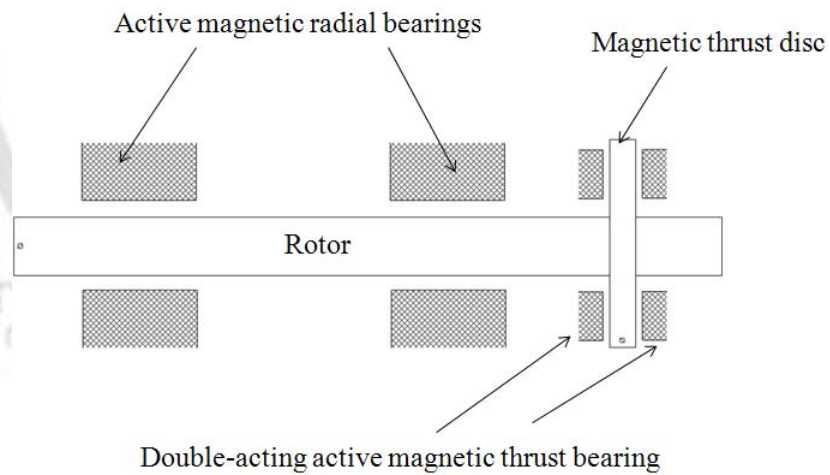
A rotor-AMB system with two radial and one double acting magnetic thrust bearings
